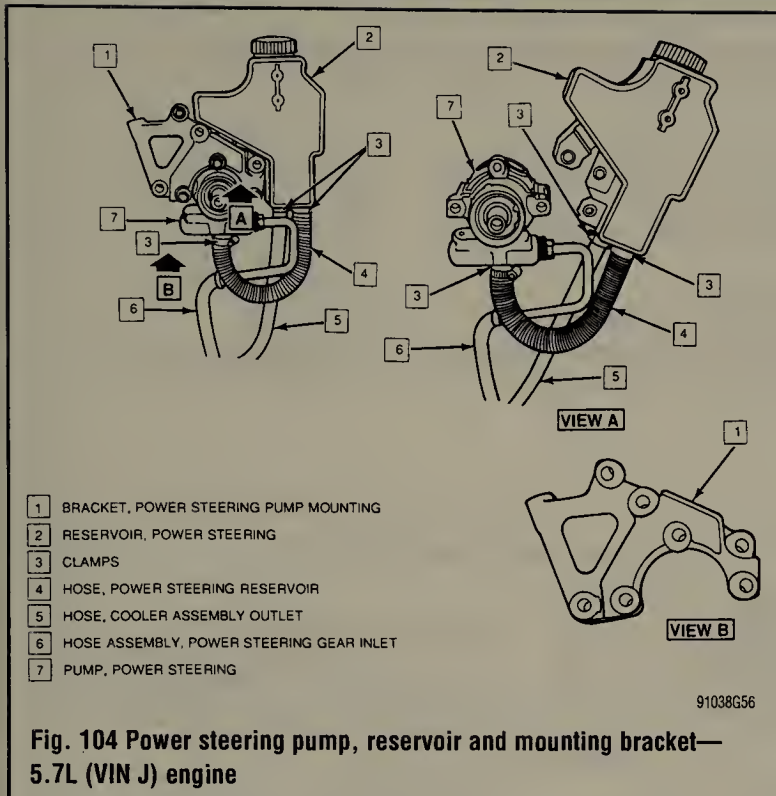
Power steering pump, reservoir and mounting bracket—5.7L (VIN J) engine
